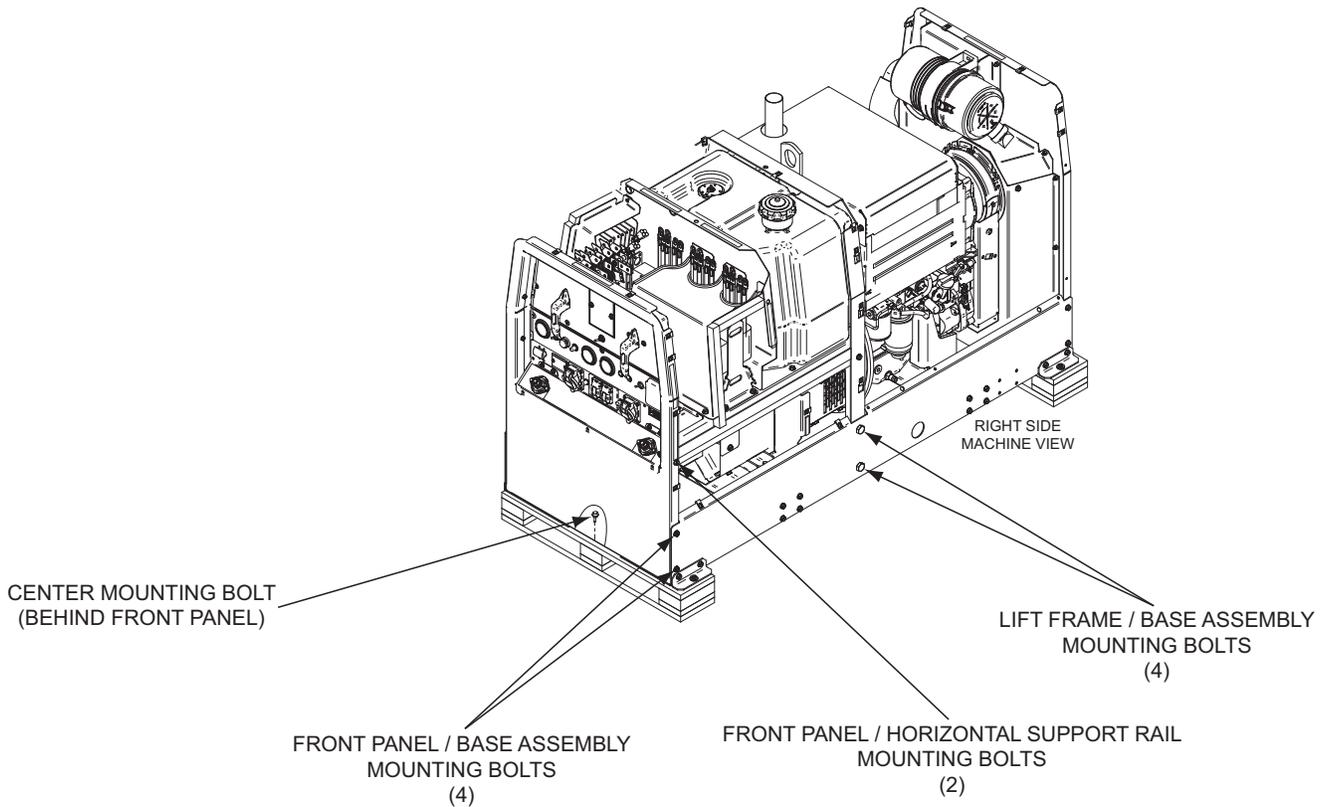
BASE ASSEMBLY MOUNTING BOLT LOCATIONS
